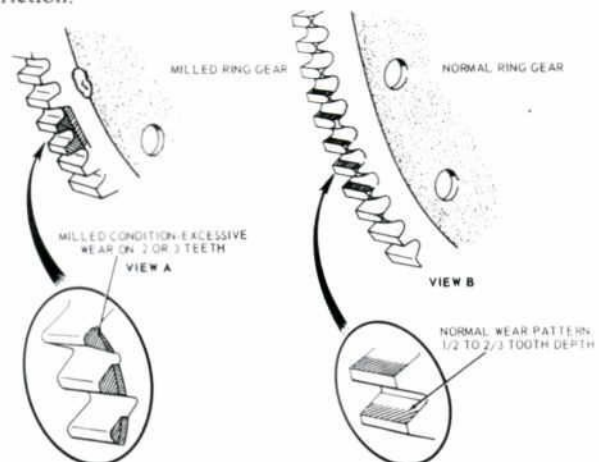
Starter Drive Pinion and Flywheel Tooth Damage
